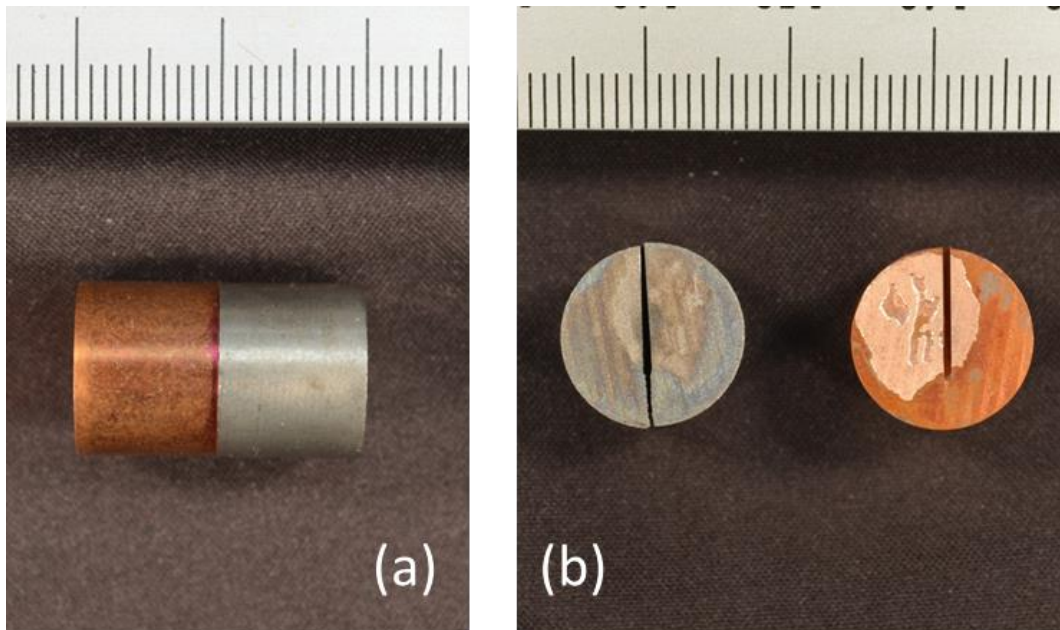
Induction furnace brazed W-AuCu-Cu part using Cw004 grade copper. Showing (a) initially joined specimen and (b) separated part following attempted sectioning
